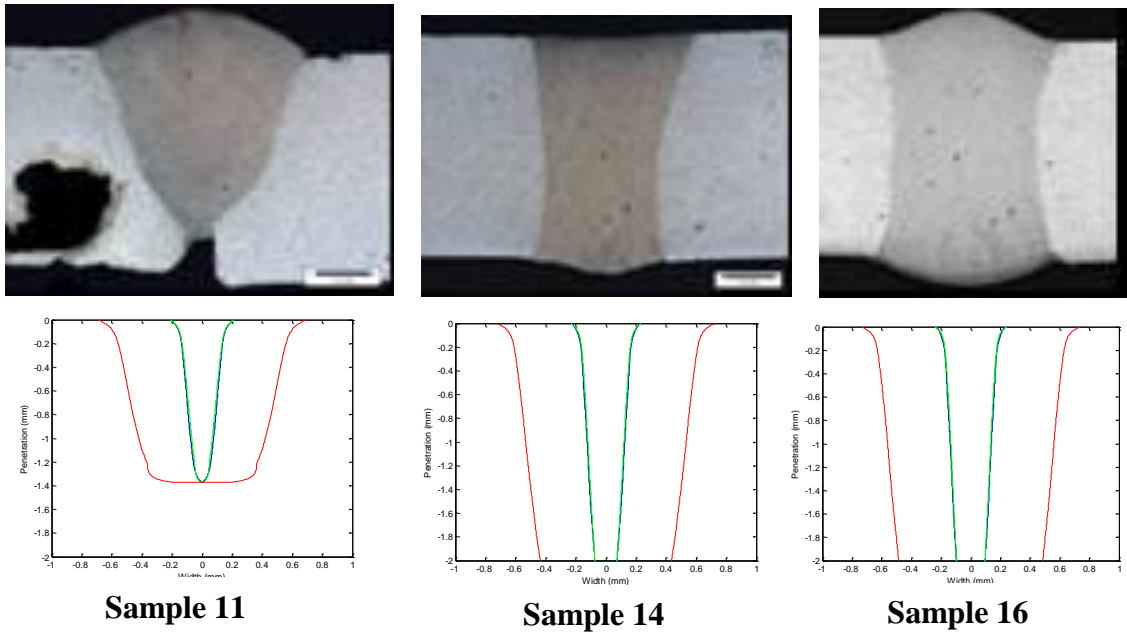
Comparison between Experimental and Calculated Weld Geometry Showing the Effect of Laser Power on Laser Welding of the 2 mm Plates
